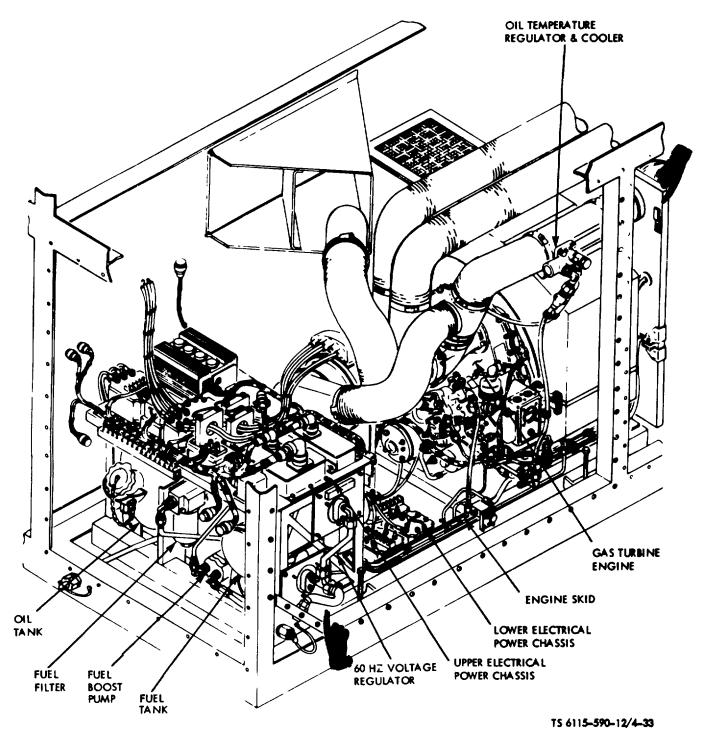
Engine and Skid Assembly (TS 6115-590-12/4-33). Change 6 4-80
